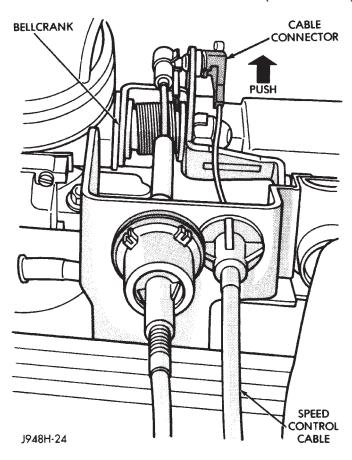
Servo Cable to Bellcrank—Remove/Install
